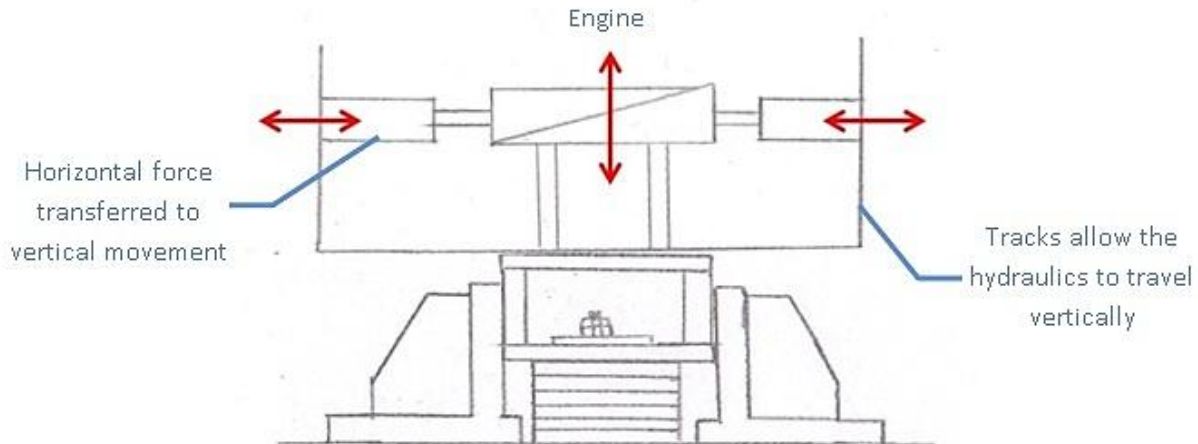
Hydraulic rams drive in wedges to raise and lower the engine.
